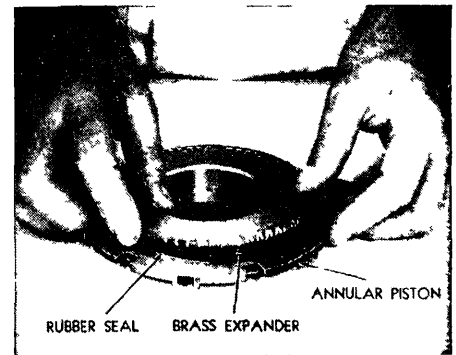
Place new rubber seal over piston beyond seal groove. Install new brass expander with lips up. Work rubber seal well into groove with lip up. See that brass edges of expander are not exposed
